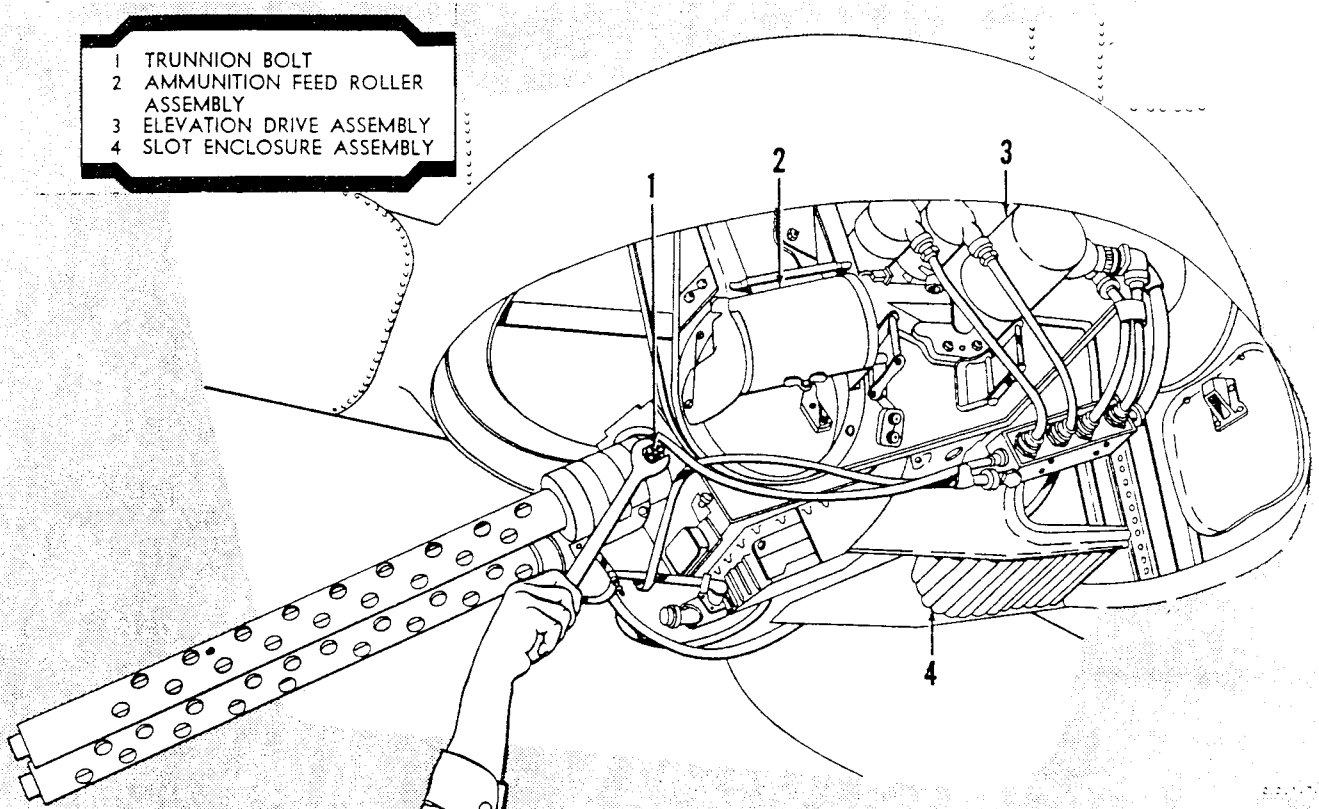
Lower Turret Guns Installation and Removal (View 1 of 3)
